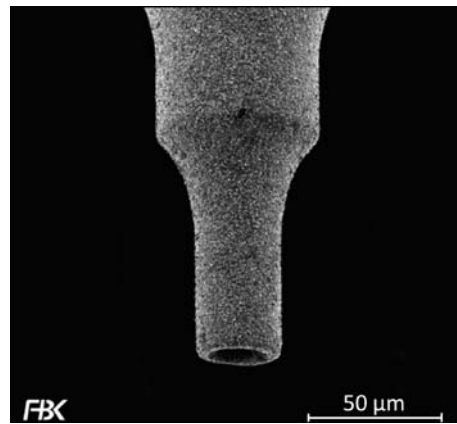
A micro pencil tool with a centric hole, aimed at avoiding low cutting speeds in the centre.
